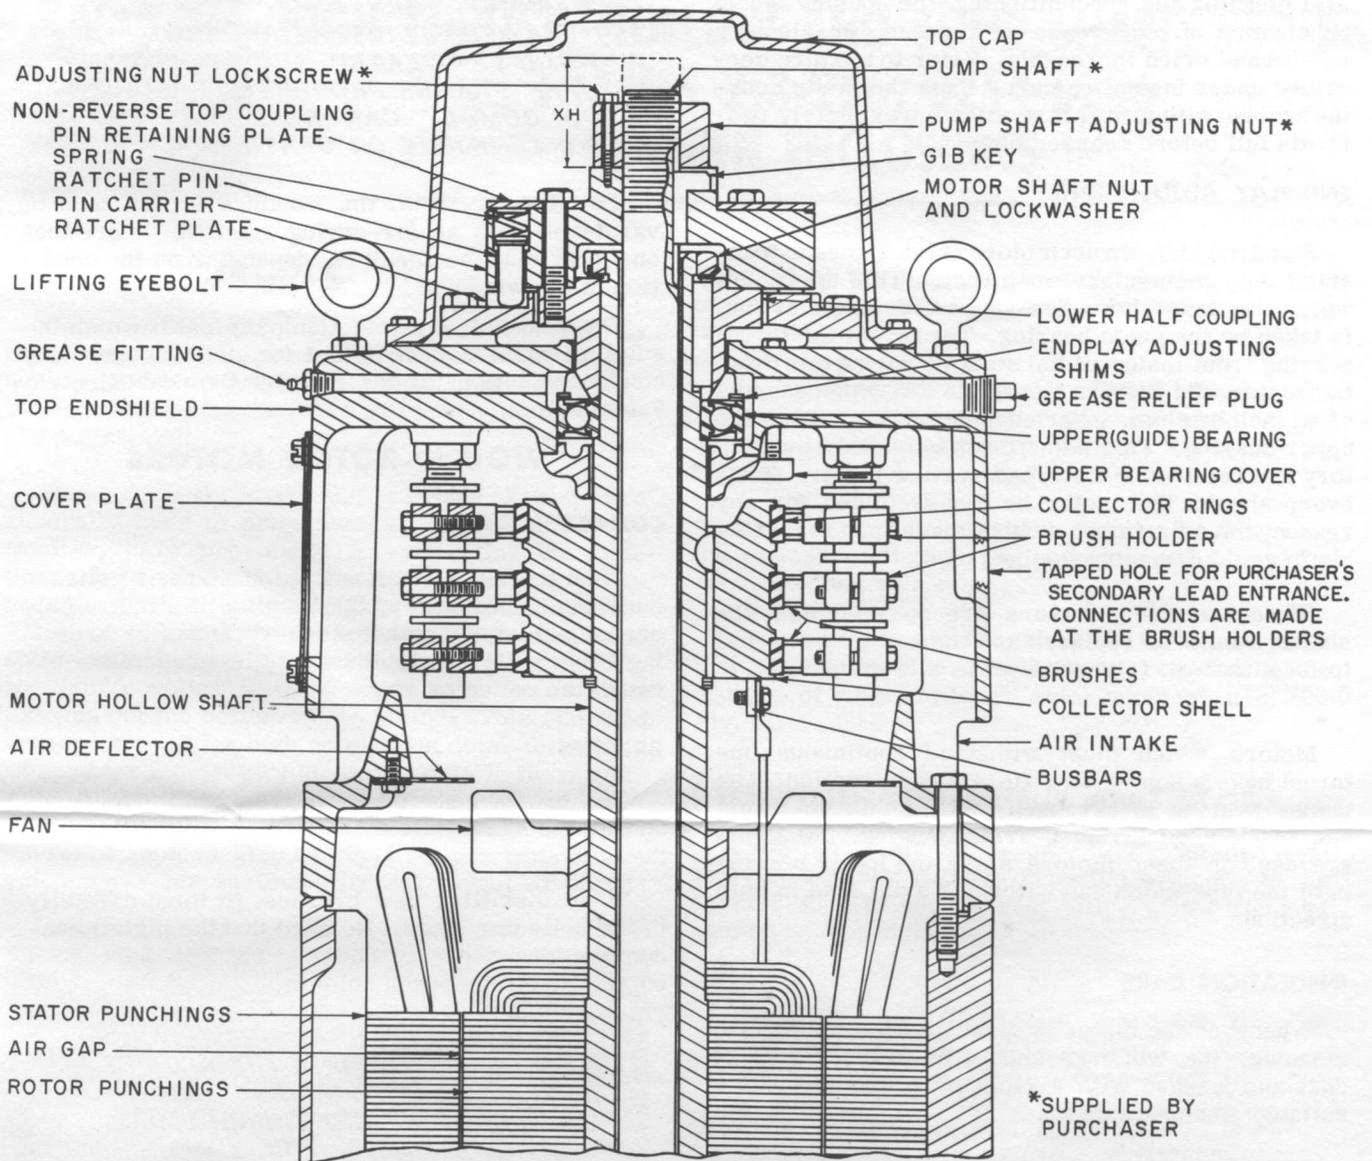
Typical wound-rotor type motor, showing rings, brushes, etc.
